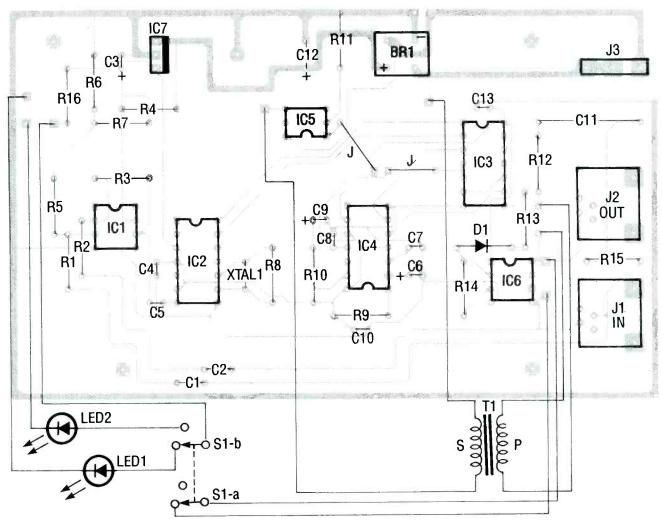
PARTS-PLACEMENT DIAGRAM. A similar layout can be used if you choose to use perfboard instead of a PC board.
